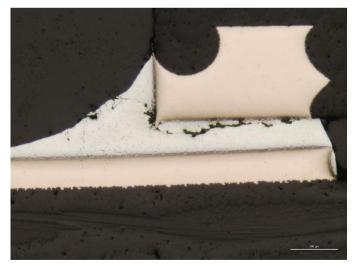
Cross-section of SAC305 soldered QFN component with 7 ppm/°C mold compound and wettable flanks
